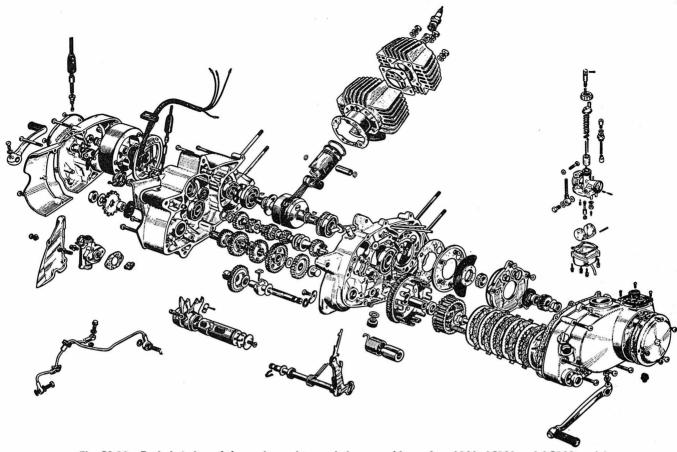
Exploded view of the engine and transmission assembly used on A100, AS100 and AC100 models.
